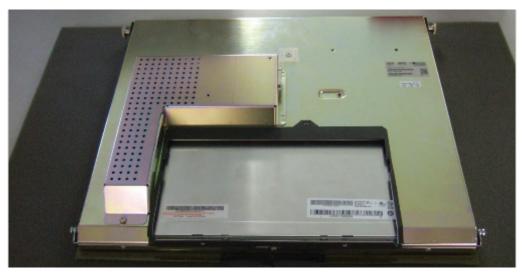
REAR OF LCD READY FOR CONTROLLER MOUNTING
